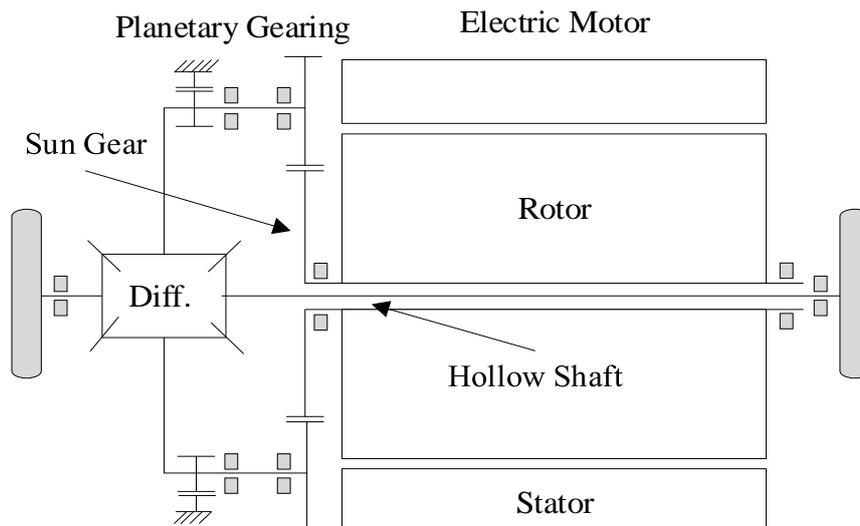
Schematic Layout of Gearing and Electric Machine of a Coaxial Electric Axle.
